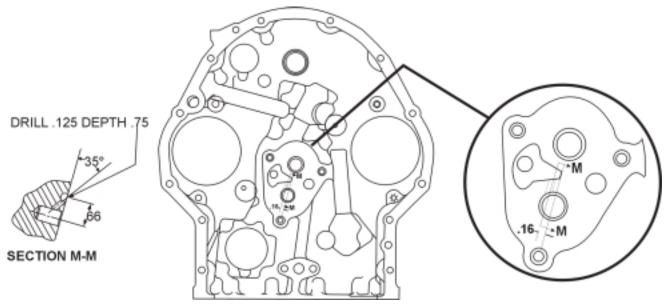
4 and 6 Cylinder Direct Drive Models Except Those With Large Volume Oil Pump (See Text)
